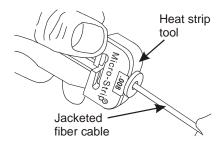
Heat-Strip Tool–Jacketed Fiber Cable
